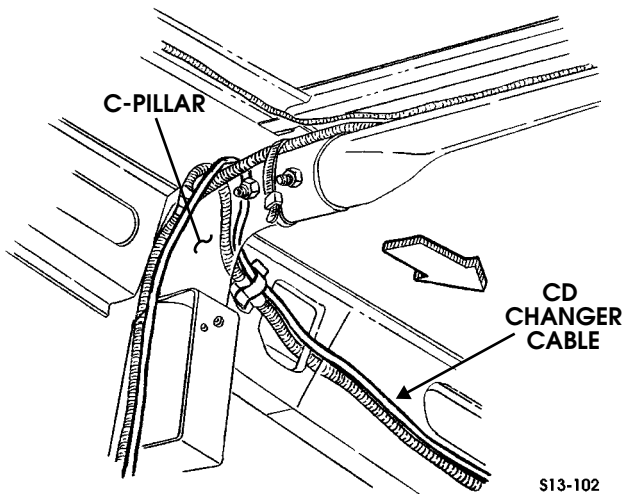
Cable Routing Along C-Pillar and Headliner - Four-Door Station Wagon Vehicles
